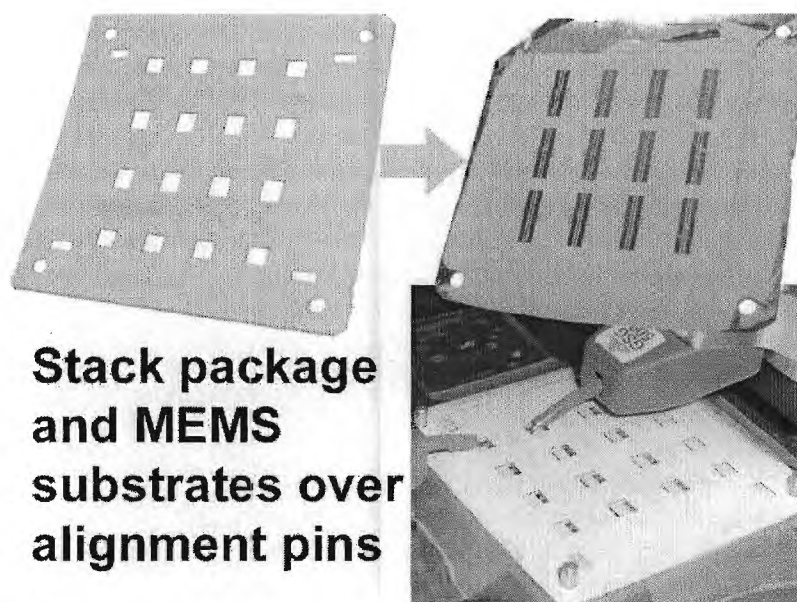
Top left: LCP superstrate packaging layer with holes for alignment and probe feed-throughs. The packaged cavities between each set of probing holes are visible due to LCP becoming partially transparent at a 2 mil thickness. Top right: CB-FGC transmission lines with air-bridge RF MEMS switches in the center of the transmission lines. Bottom right: Both layers stacked on alignment fixture and probed through the feedthrough windows.
